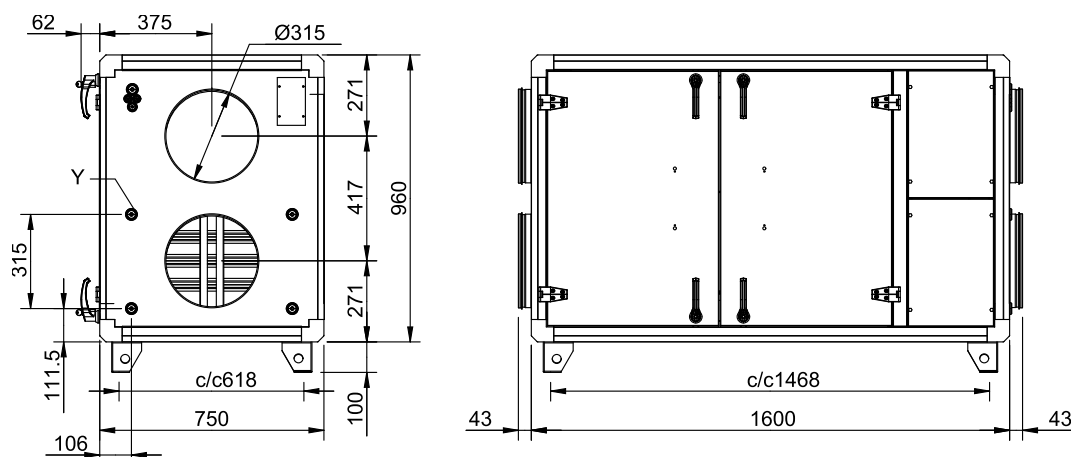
Dimensions (mm) SR03 (Drawn as a right hand unit)
